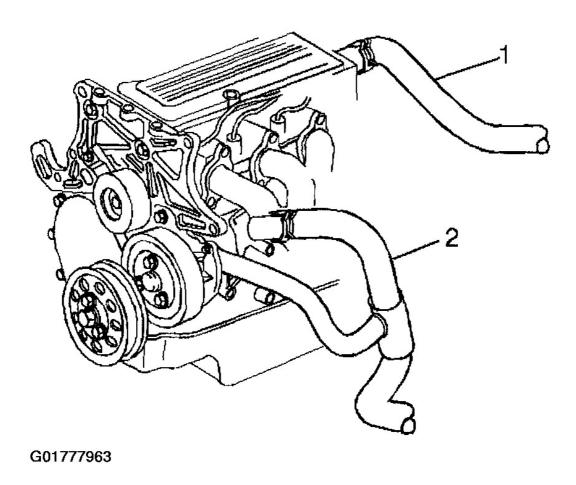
Radiator Outlet Hose Courtesy of GENERAL MOTORS CORP.
